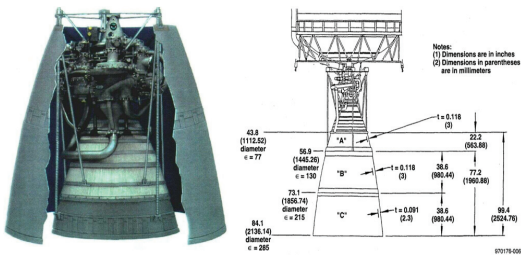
RL10B-2 engine and its nozzle extension dimensions[8].
